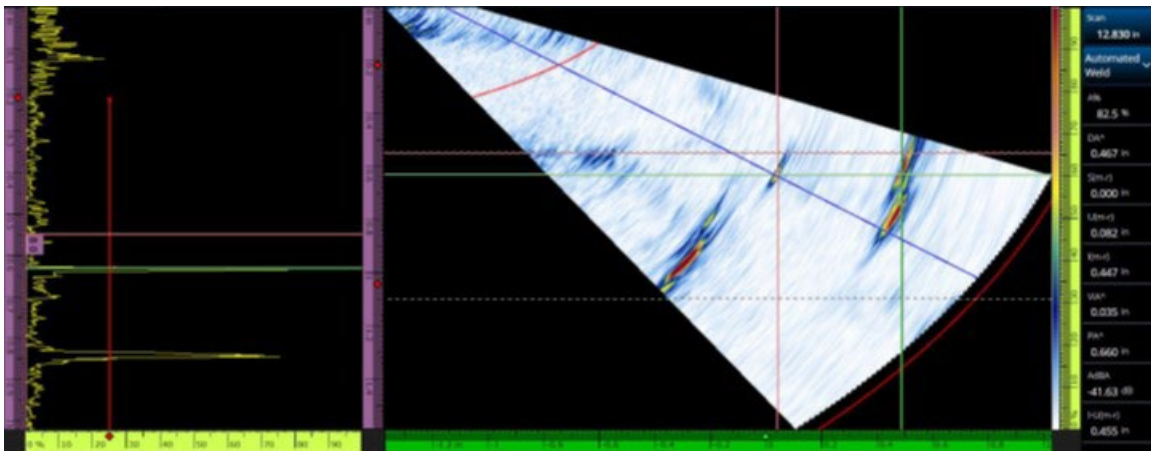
PAUT indication of defect at Location B in fillet weld test panel MGL-9 from Repad-raster scan
